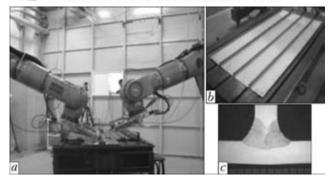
Dual-beam laser robotic system for welding of aluminum and titanium airframe (*a*), stiffened panels with (*b*) T-joint simultaneously from both sides of fillet welds (*c*)
